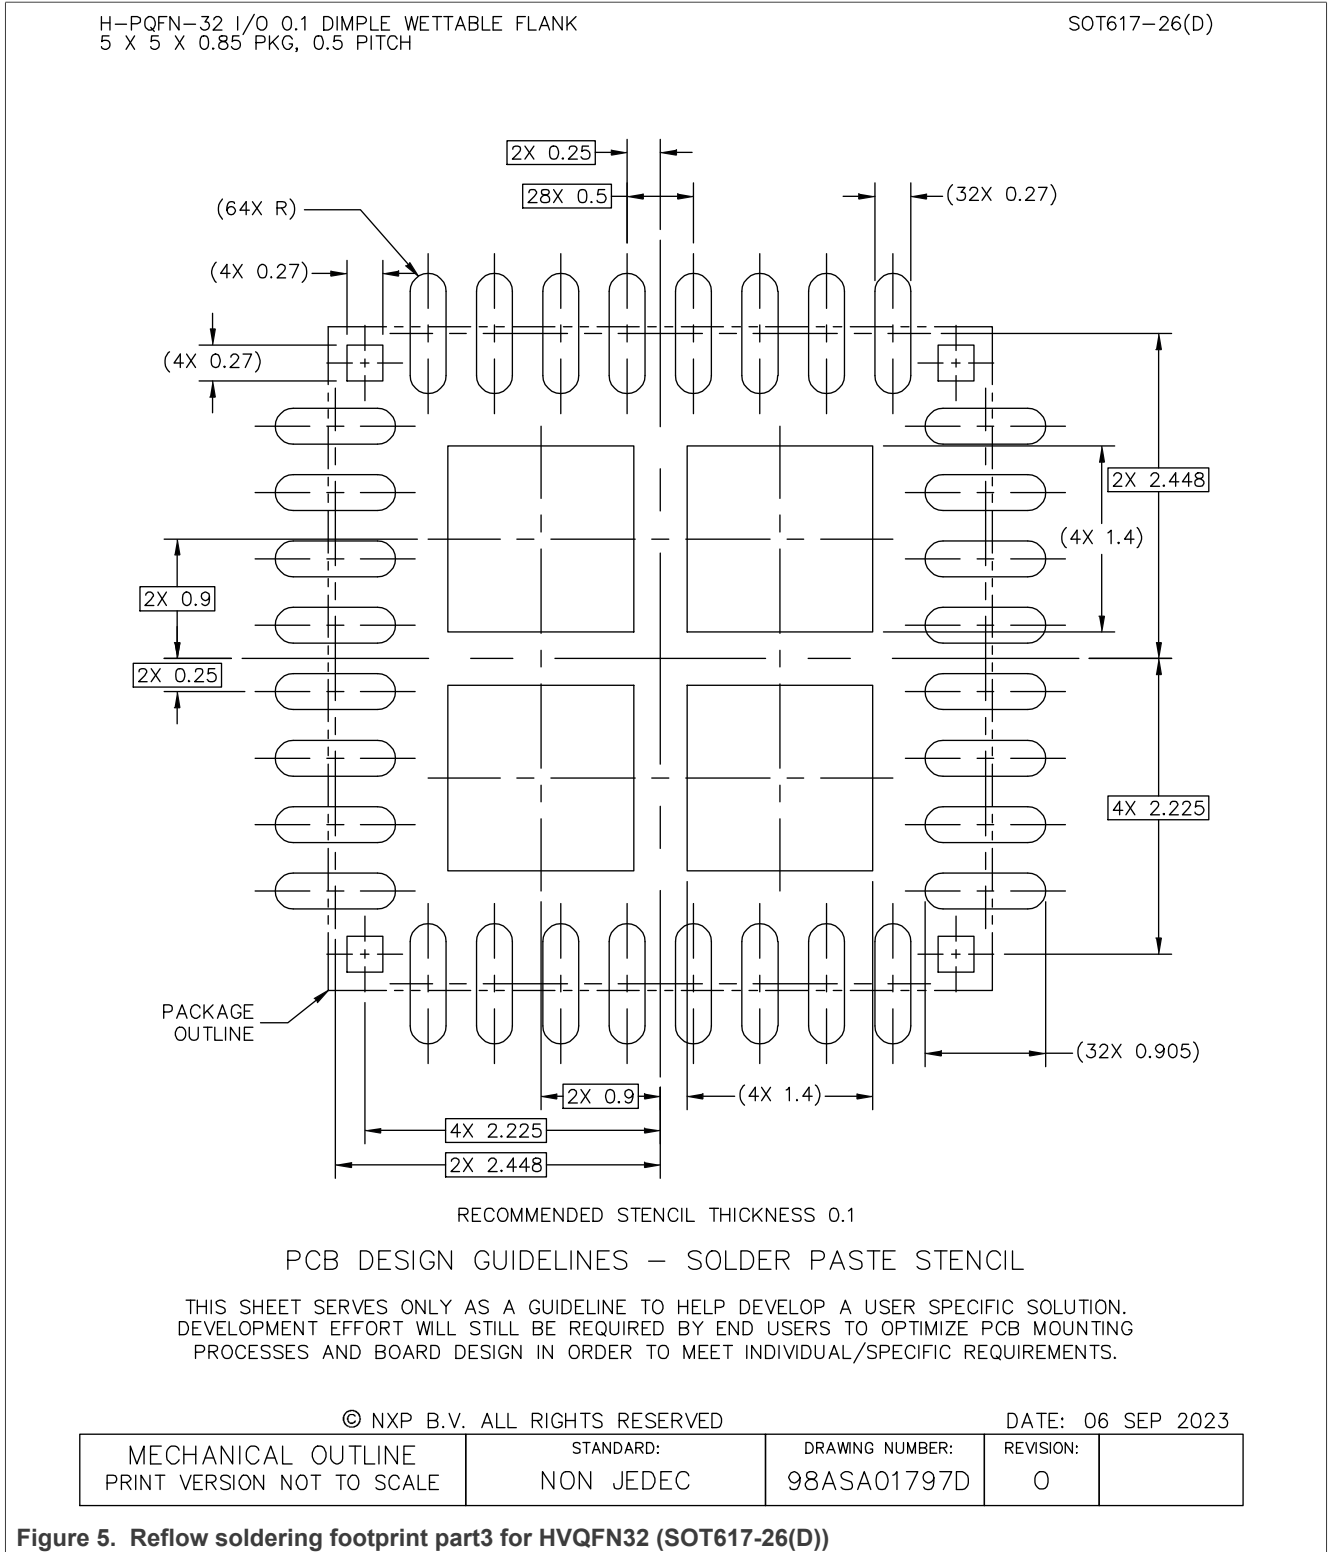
Reflow soldering footprint part3 for HVQFN32 (SOT617-26(D))
